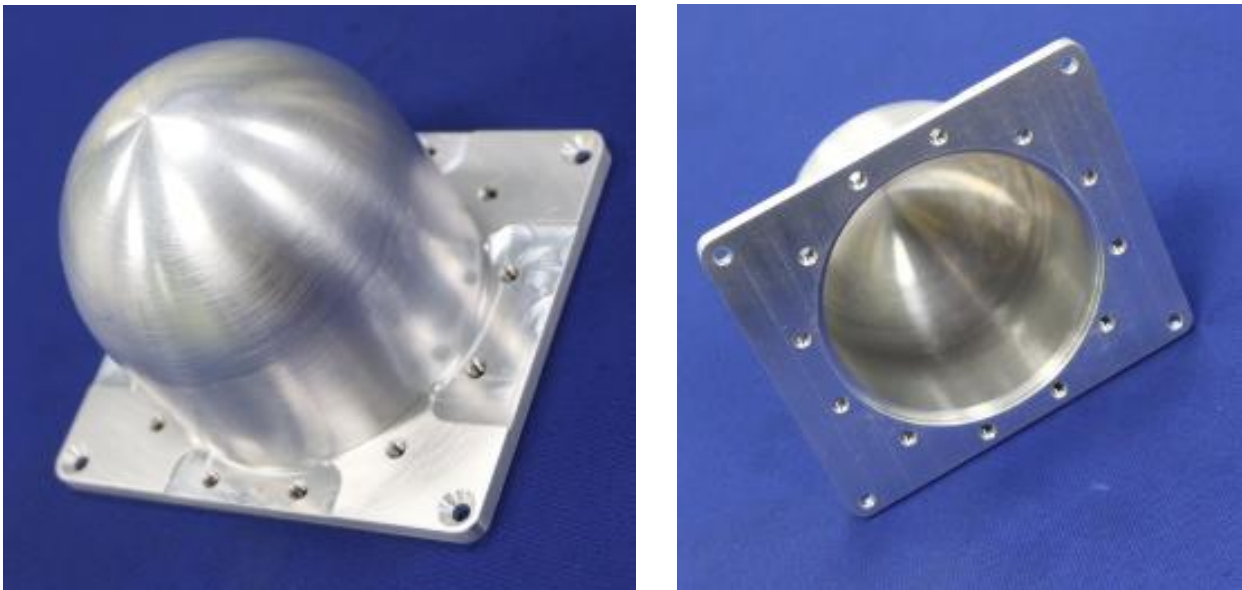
Payload detector vessel lid top view (left) and bottom view (right), fabricated December 2020.
